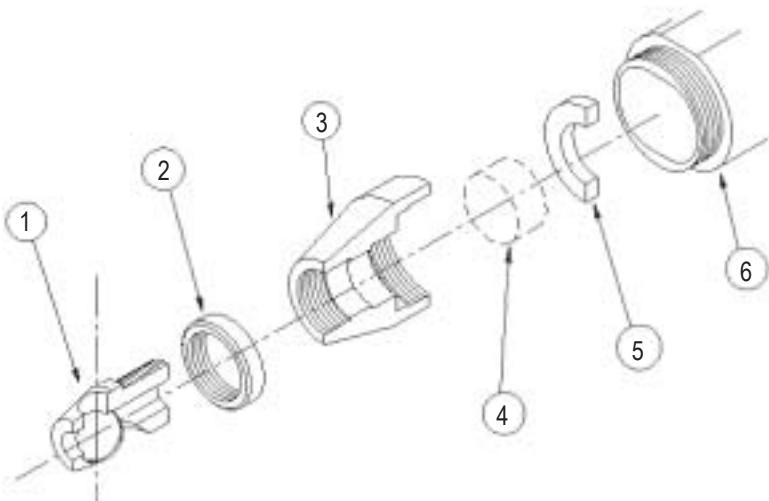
Exploded and Sectioned View of Laser Input Sensor Front End
